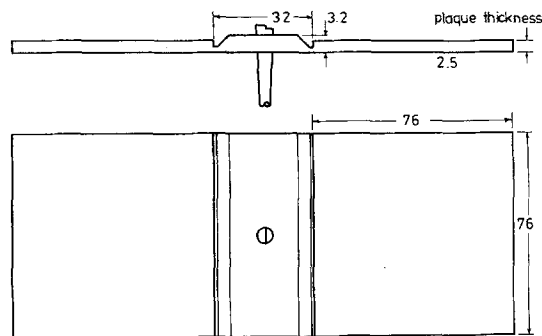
Shape and dimensions (in millimetres) of the plaque mould.
